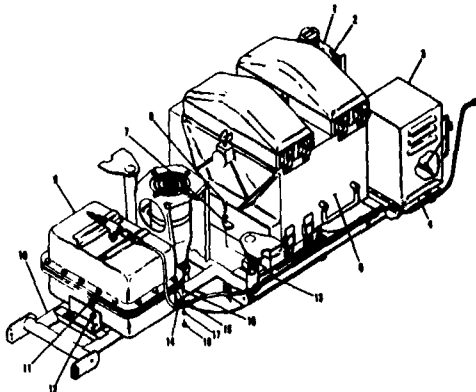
(a) Pictorial View of Scorer Equipment Assembly
